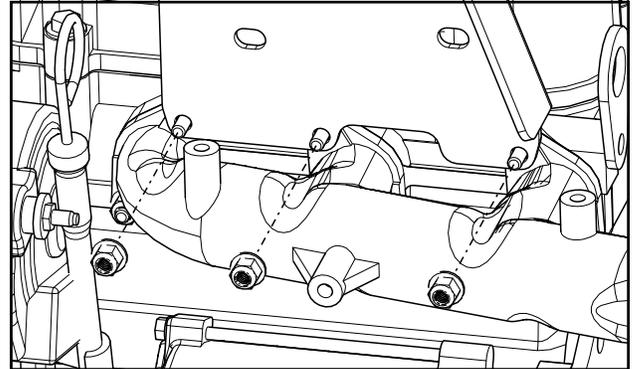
(Upper Auxiliary Alternator Bracket)
